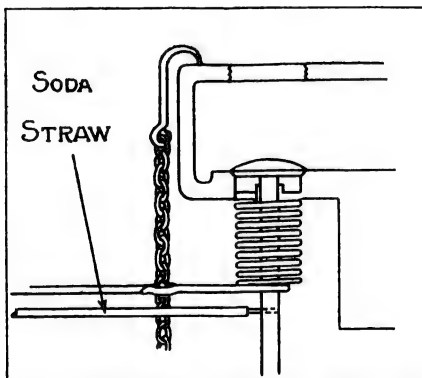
How to Use Soda Straw to Insert Small Pins.
